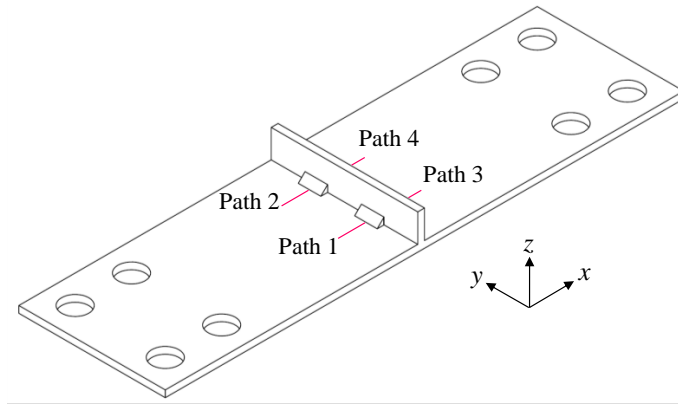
Schematic representation of the four paths used in the evaluation of the residual stresses of the fillet welded specimens in Publication III. Experimental measurements were carried out along Path 1 and Path 4 only. The measurement path for angular distortion was exactly the same as that shown in Figure 2.8.
